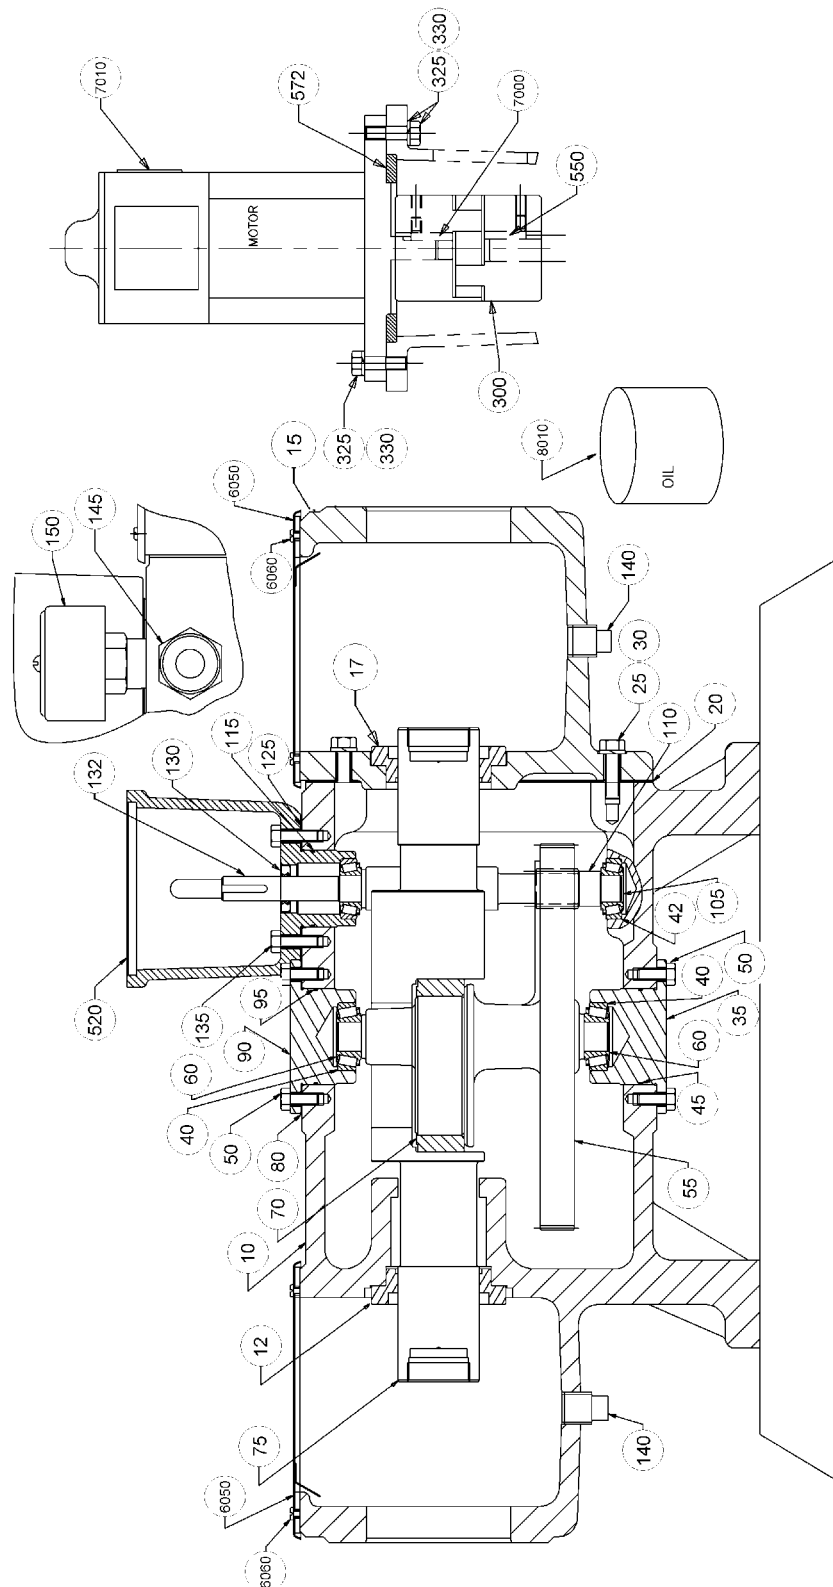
Centrac Duplex Drive Assembly Parts Reference Drawing (DWG. 102-2925-0002).
